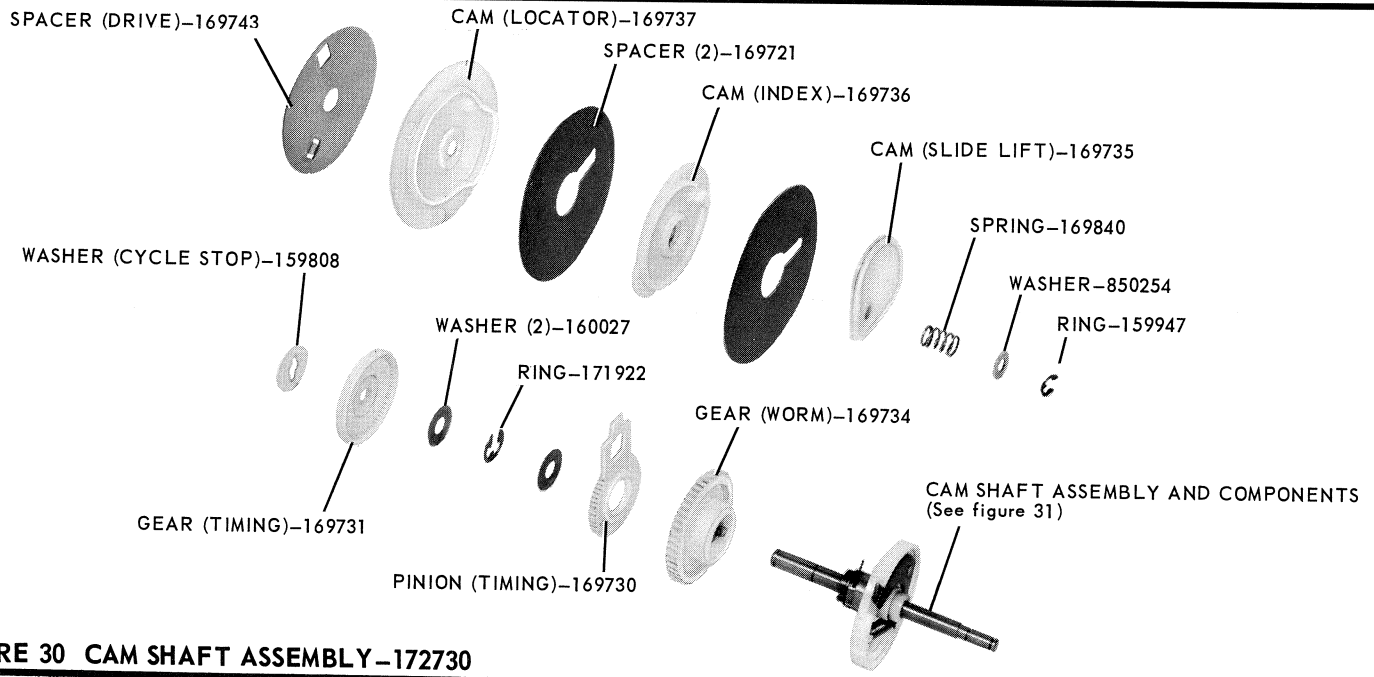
CAM SHAFT ASSEMBLY-172730
